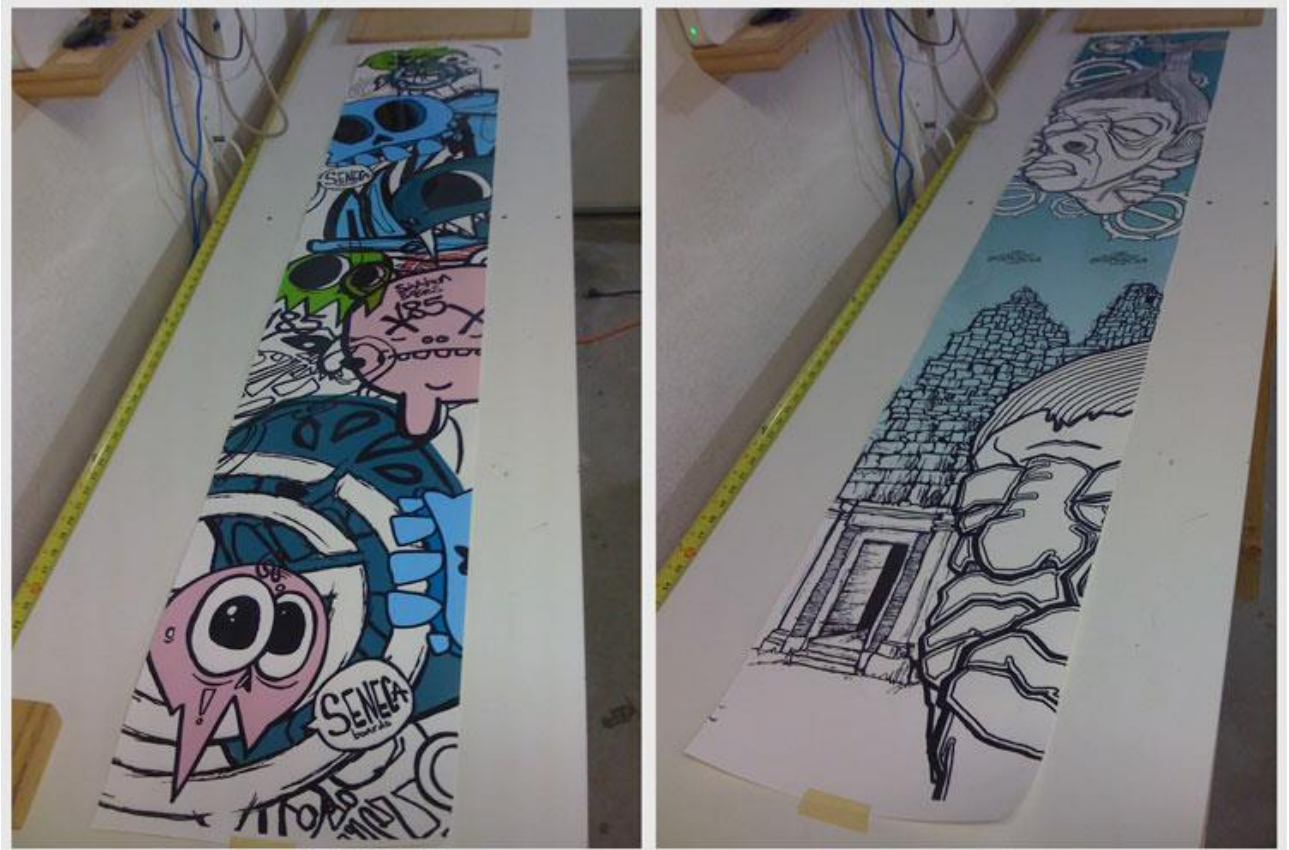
Example of topsheet used for ski manufacturing. Picture from [8].
